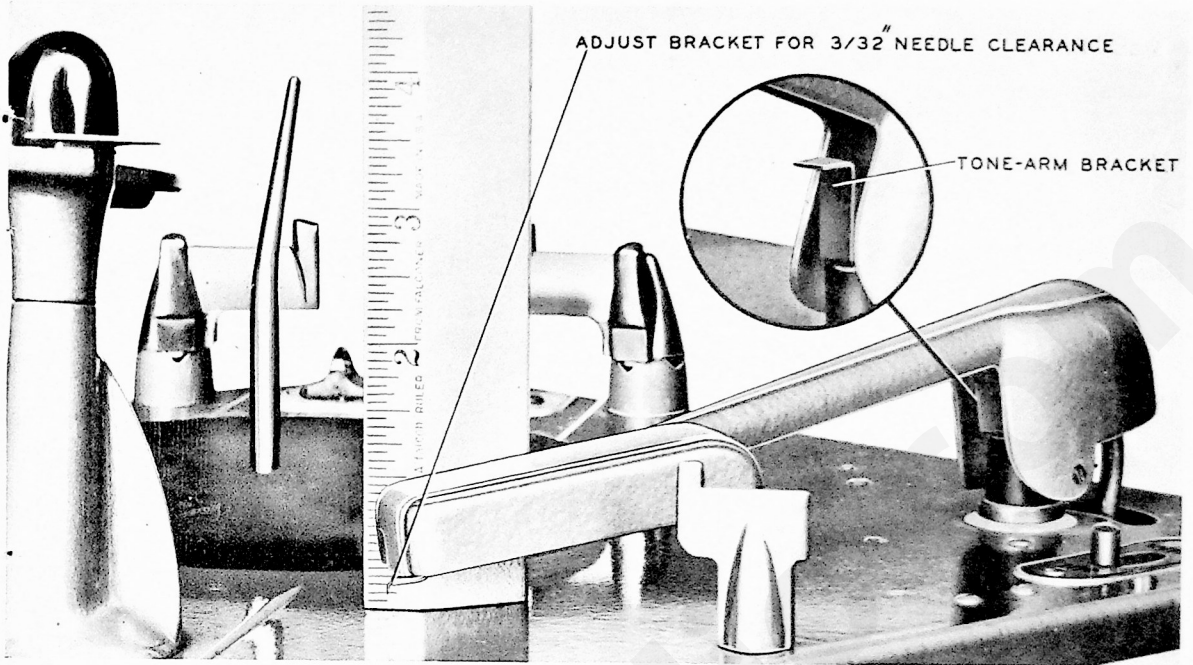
TONE-ARM BASE-PLATE CLEARANCE
